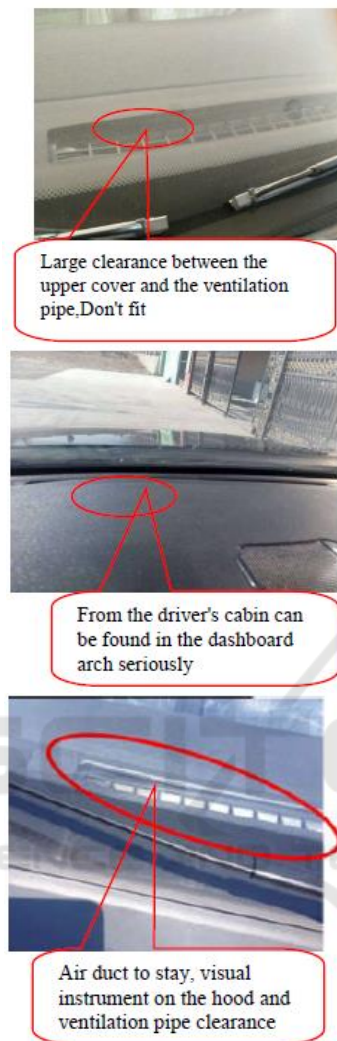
Defrosting ventilation pipe on instrument is deformed.
